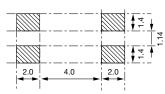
CSM-8B — Recommended Solder Pad Layout Top view
